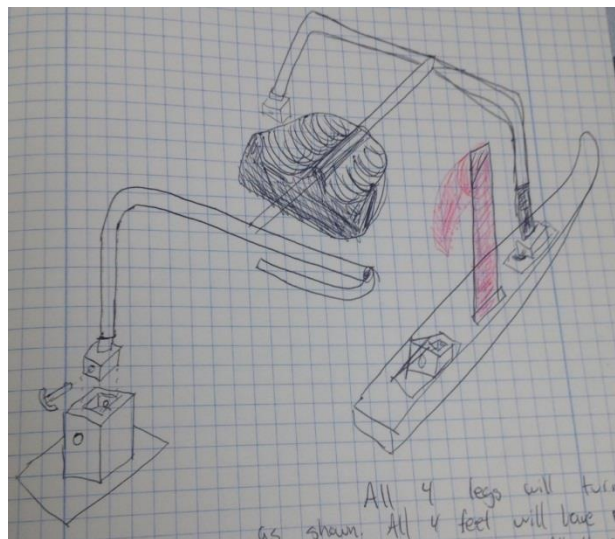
System Design Option 2: Raised Steering; Molded Seat; Side-to-Side Collapsibility; Pins for Universal Mounting
